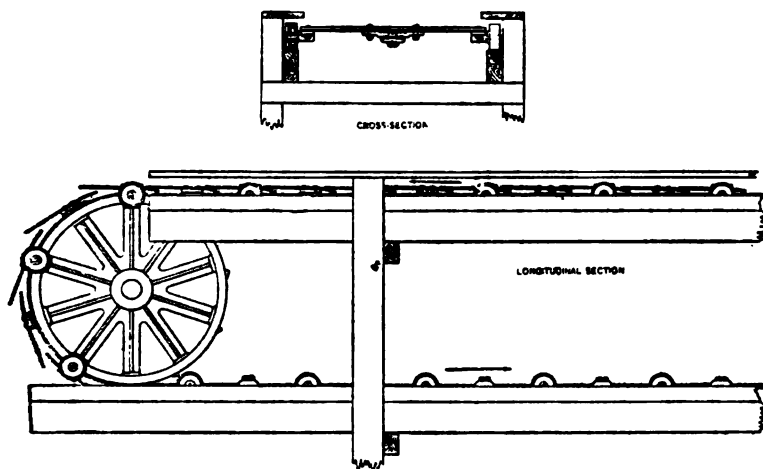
Conveyor for Sorting Chips in Wood Pulp Mills.
